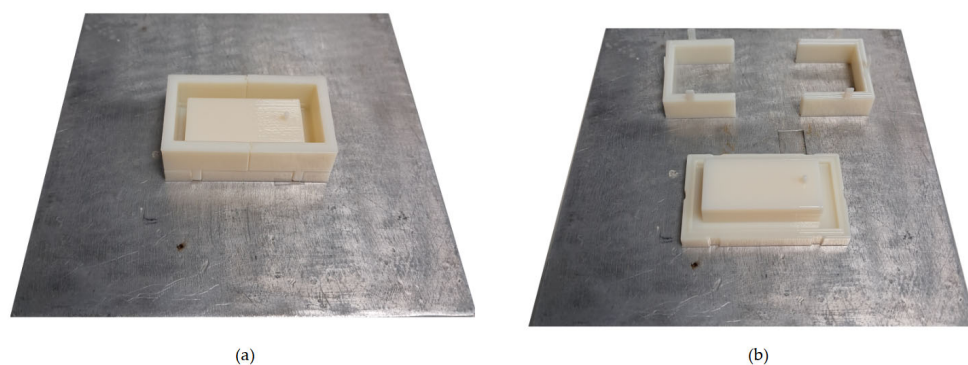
Three-dimensional-printed prototypes on a metal baseplate. (a) illustrates the assembled prototype, while (b) shows the individual components, possibly for examination or further assembly.
